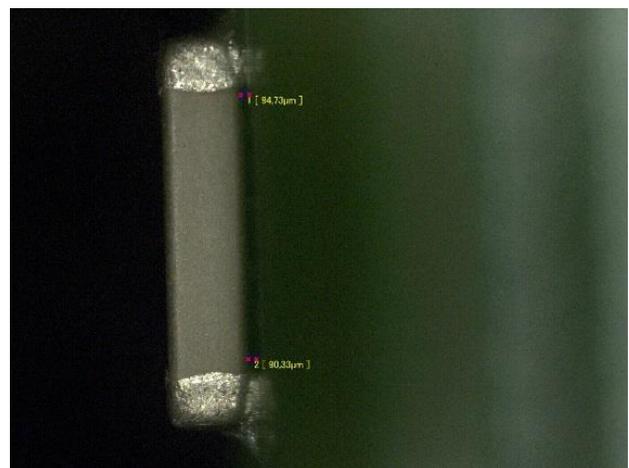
Type 6 – Component 1206 (≈ 2 mil)
